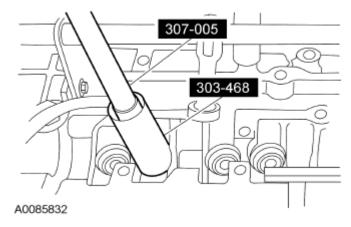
Removing Valve Seal Courtesy of FORD MOTOR CO.
